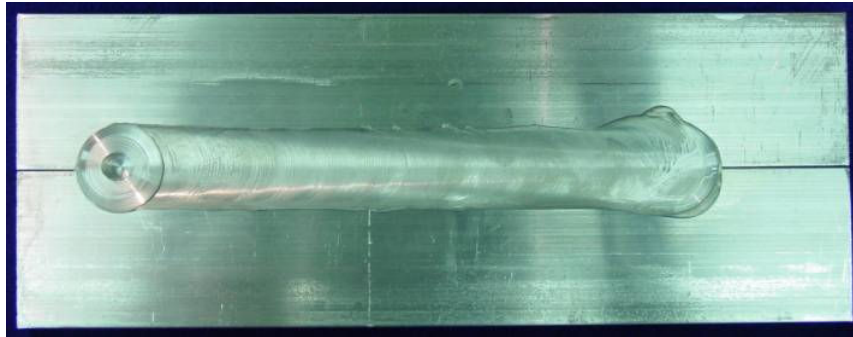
Weld sample with 1 millimeter ramp.
